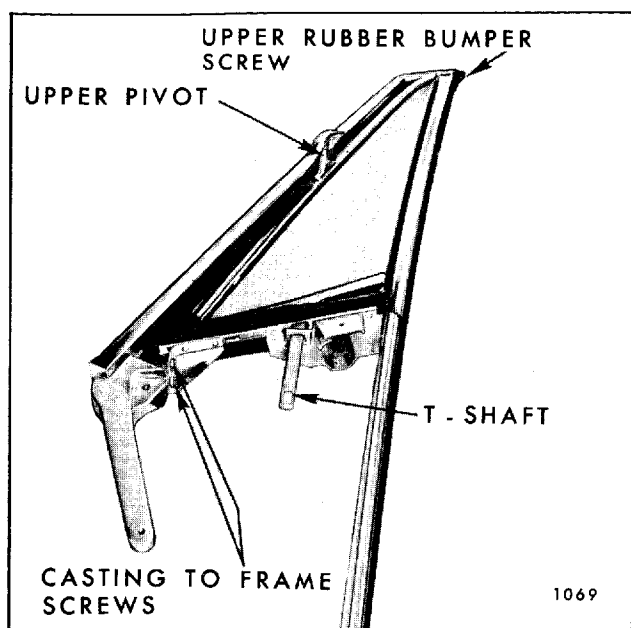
Front Door Ventilator - "B & C" Styles
